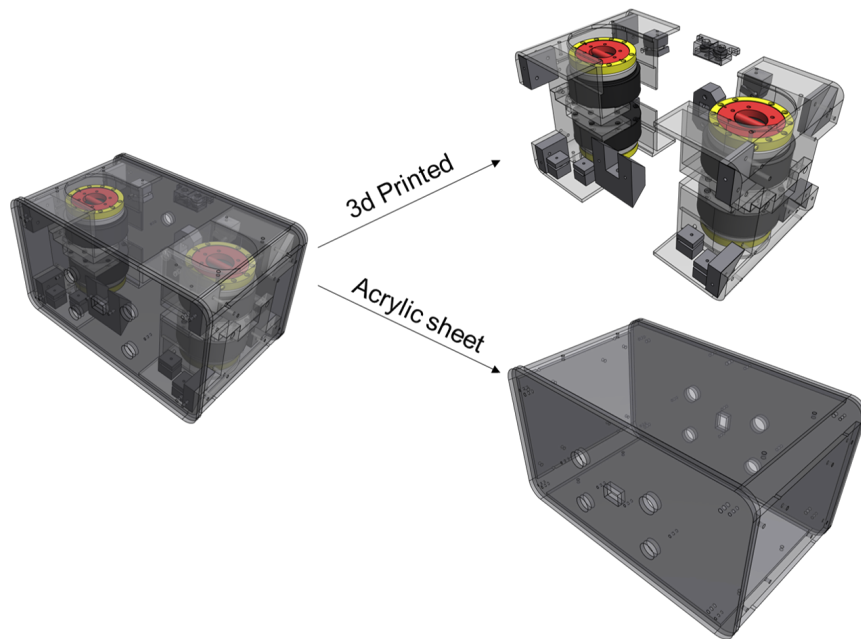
Middle body segment composition diagram. The outer shell is made of 8 acrylic sheets and other parts are 3D printed.
